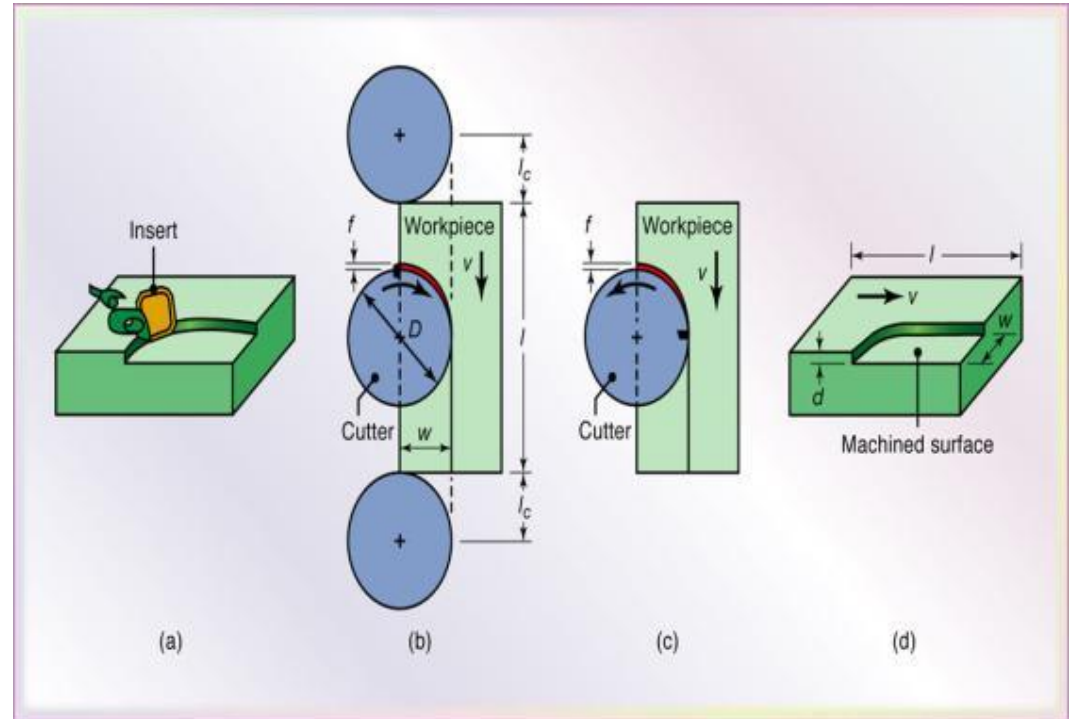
Face-milling operation showing (a) action of an insert in face milling; (b) climb milling; (c) conventional milling; (d) dimensions in face milling. The width of cut,  $w$ , is not necessarily the same as the cutter radius.
